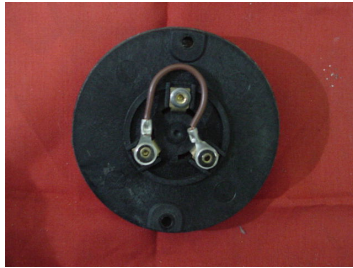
Soldered Connection, Photo 5-10 - Riveted connection
